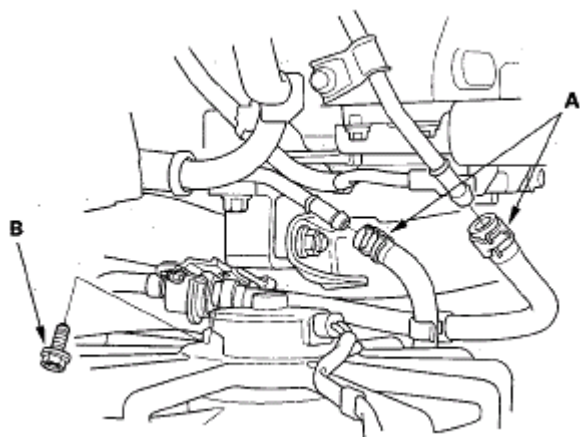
Identifying Automatic Transmission Fluid (ATF) Cooler Hoses And ATF Filter Mounting Bolt
